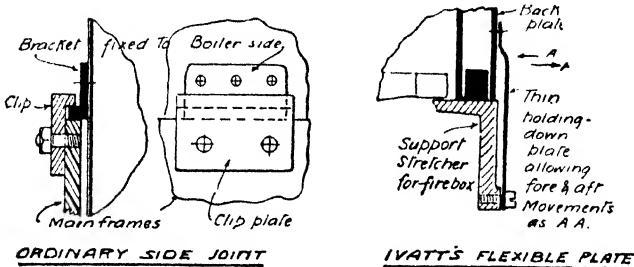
A.—Two Forms of Expansion Fixings for Boilers to Main Frames.
